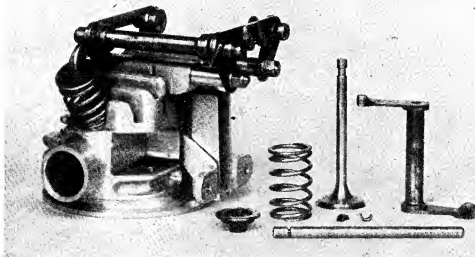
The cylinder-head with one valve assembly removed. Since this photograph was taken a second spring has been fitted to each valve
